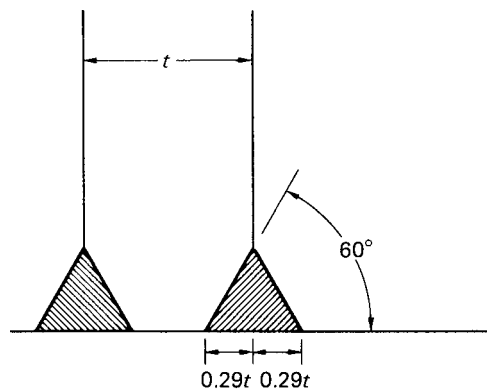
Partial-penetration double-bevel groove joint. t, plate thickness. Depth of bevel is 29% of plate thickness.
